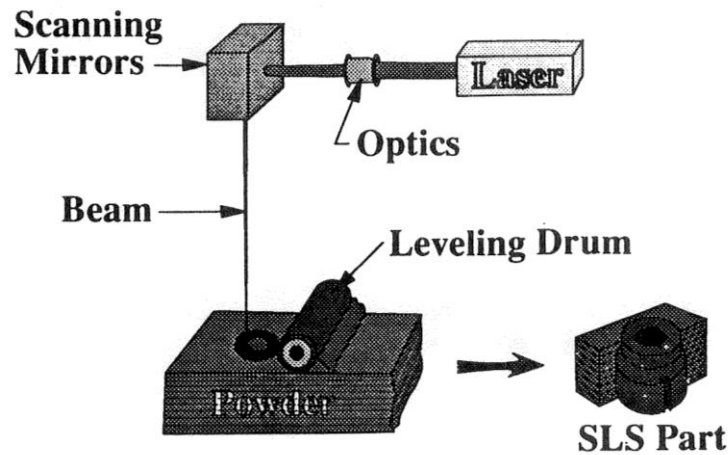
Schematic of the Selective laser Sintering Machine. Taken from Bourell (1990) [2].
